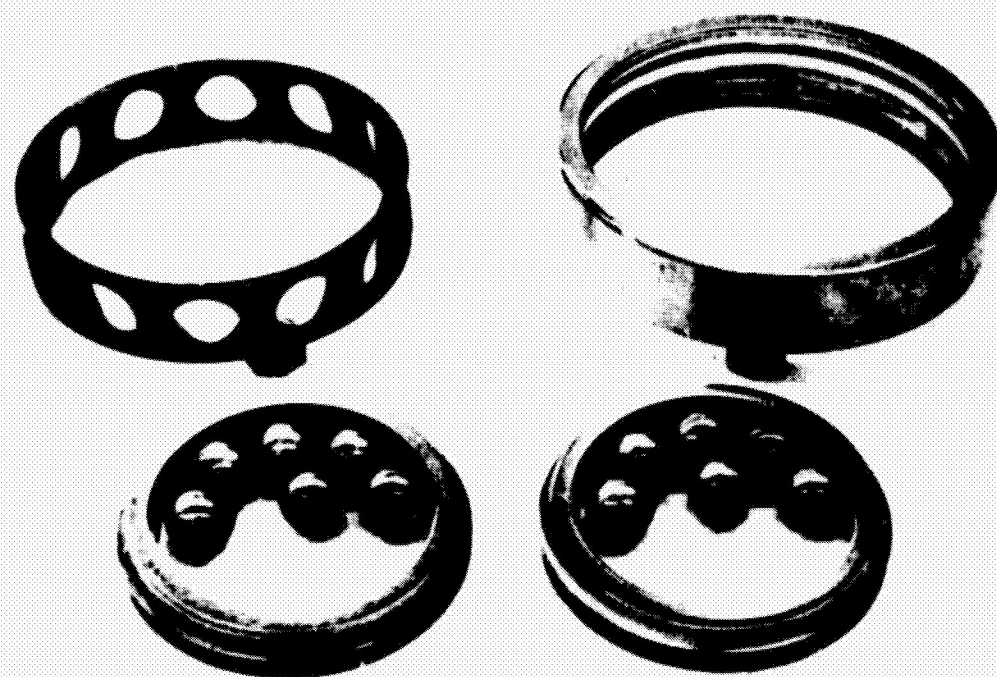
Appearance of Thrust-Bearing Components, Including Irradiated PBI-Glass Retainer S/N 880027, After 7.75 hr Operation
